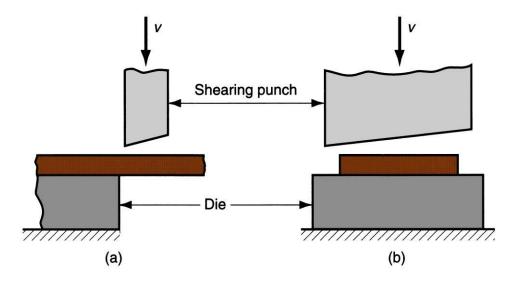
Shearing operation: (a) side view of the shearing operation; (b) front view of power shears equipped with inclined upper cutting blade.
